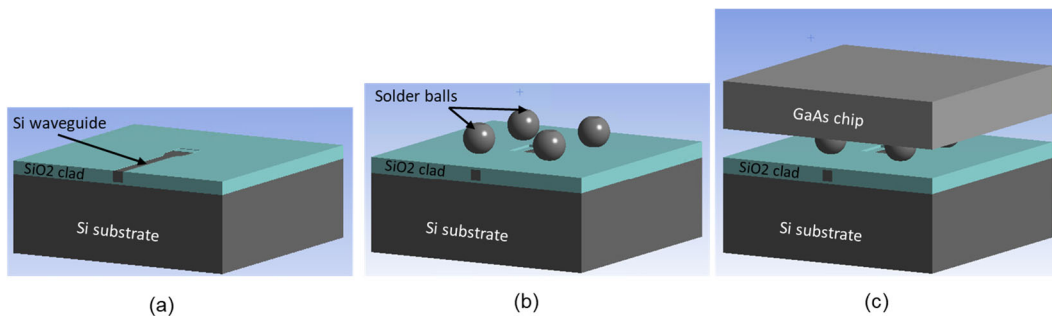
Schematic representation of the fabrication process of III-V/Si laser device (a) bottom Si Chip with waveguide; (b) deposition of interconnect pads; and (c) flip-chip bonding of Si and GaAs chips.
